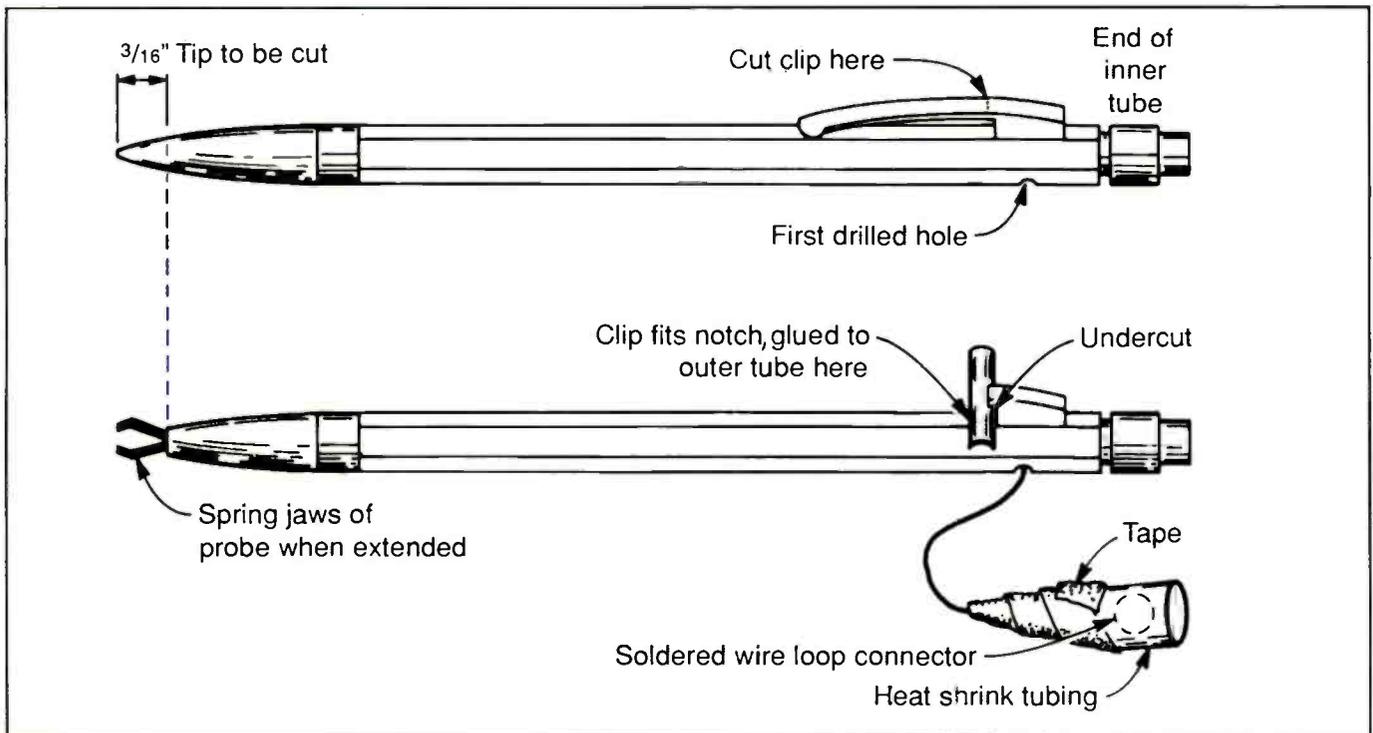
The upper drawing shows the mechanical pencil before it is altered, and the lower drawing shows the completed probe with the jaws extended.
